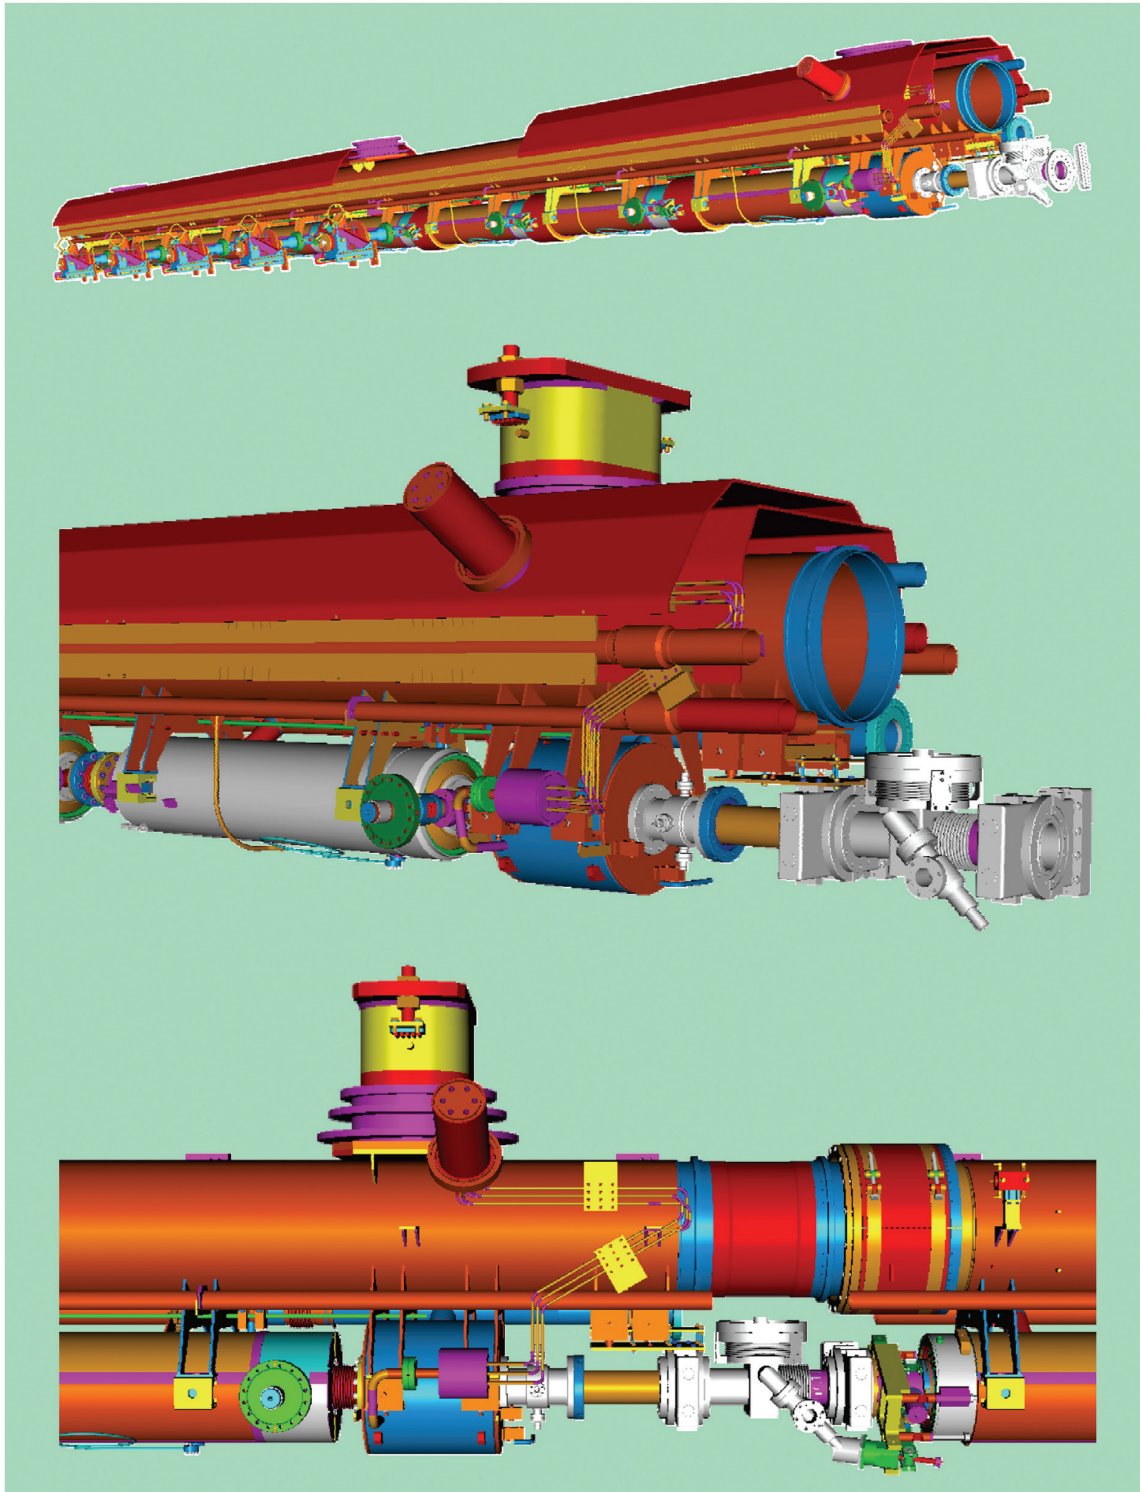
CAD cut-away view of the type-3+ cryomodule.
